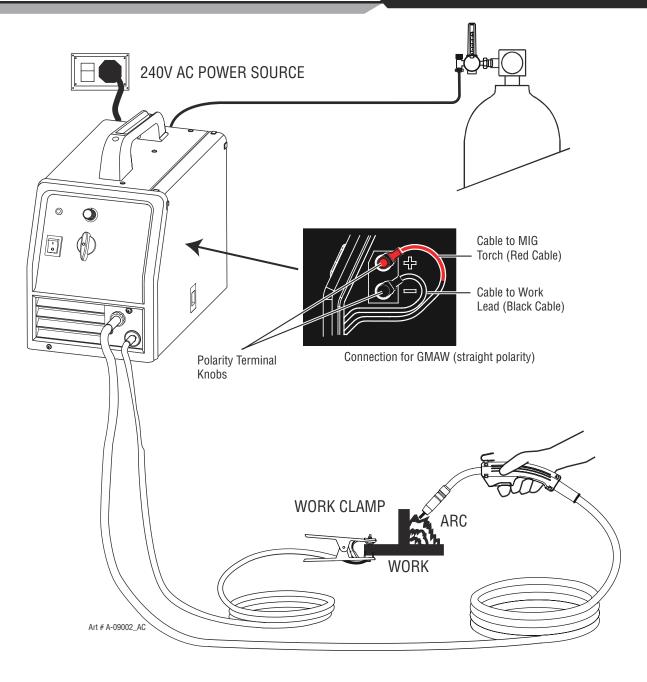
Gas Shielded Set-up for WeldSkill 135 Mig
